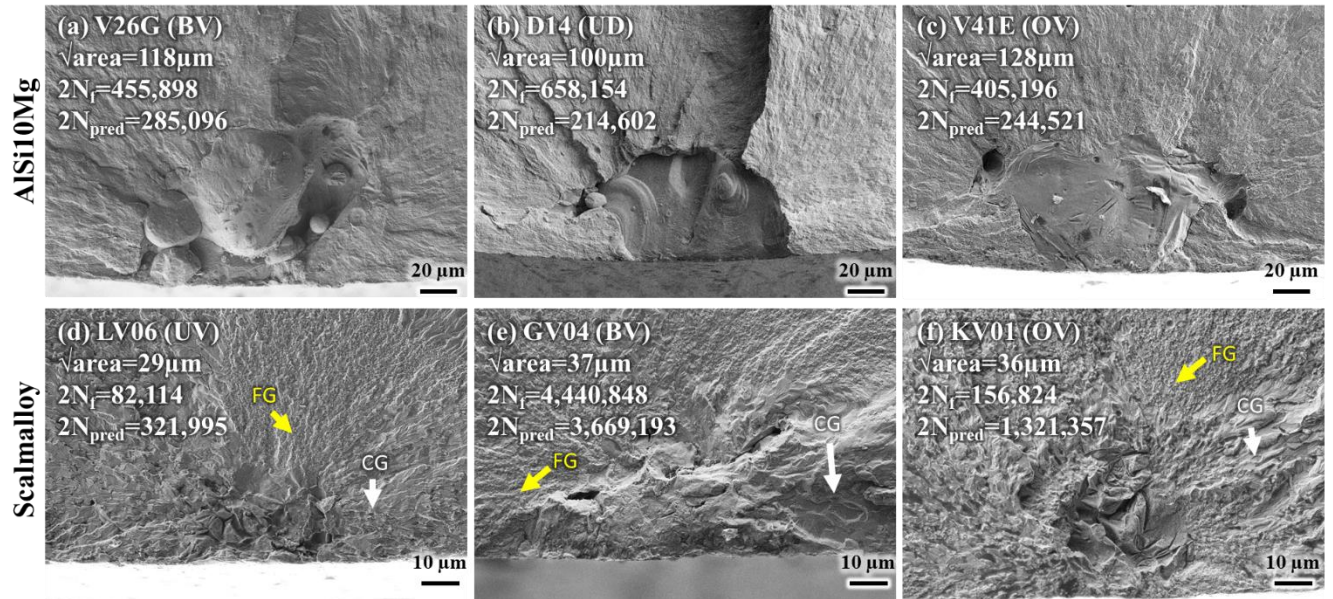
Fracture surfaces showing the crack initiating defects for (a)-(c) AlSi10Mg and (d)-(f) Scalmetalloy.
